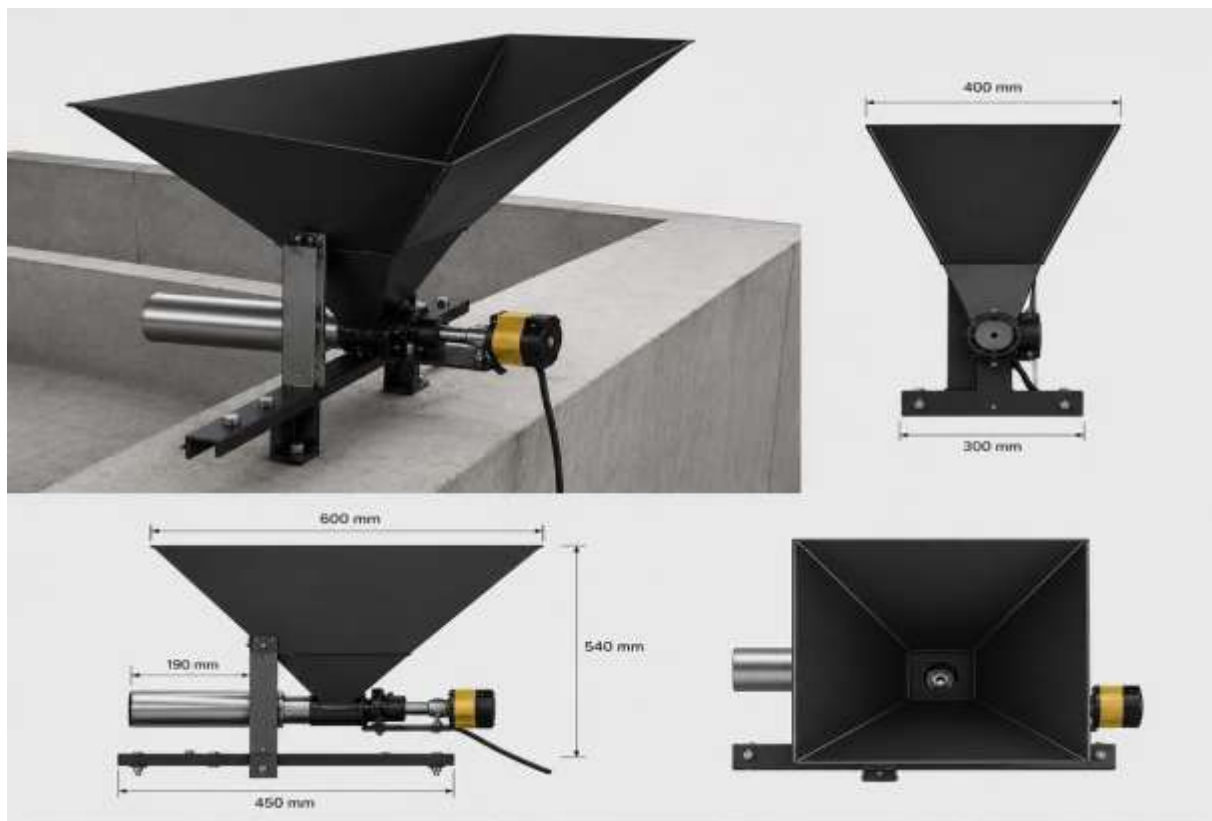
Final Dimensioned Design of the SmartAQUA Feed-Dispensing Assembly
